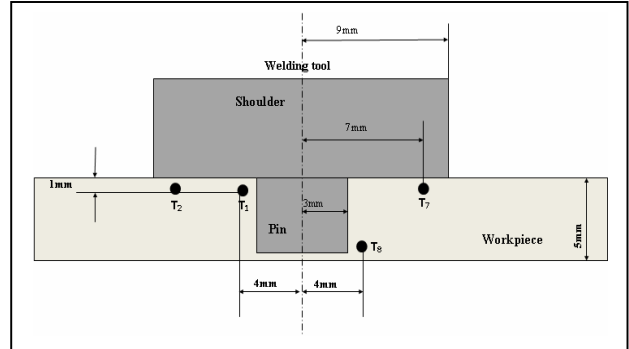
Thermocouples position at tool penetration on workpiece at section A-A.
